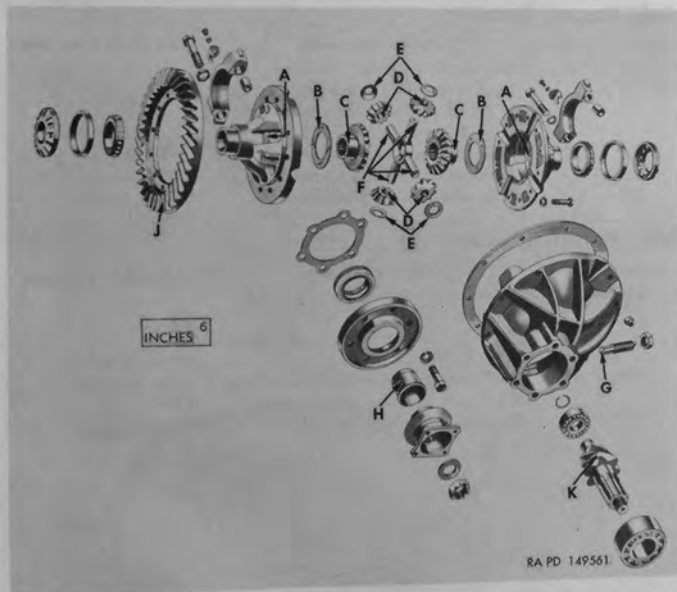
Repair and rebuild standard points of measurement for axle differential assembly.
